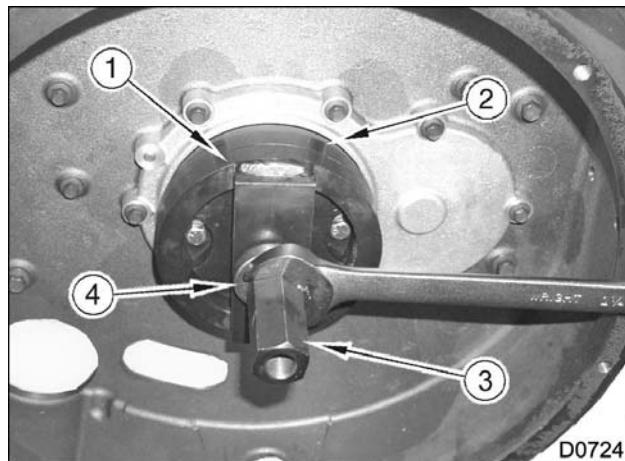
Rear main oil seal and wear sleeve combination on crankshaft
